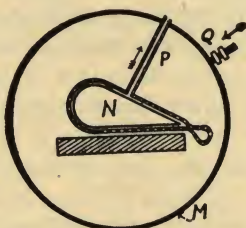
Molding sub-assembly parts in pressure tanks.
